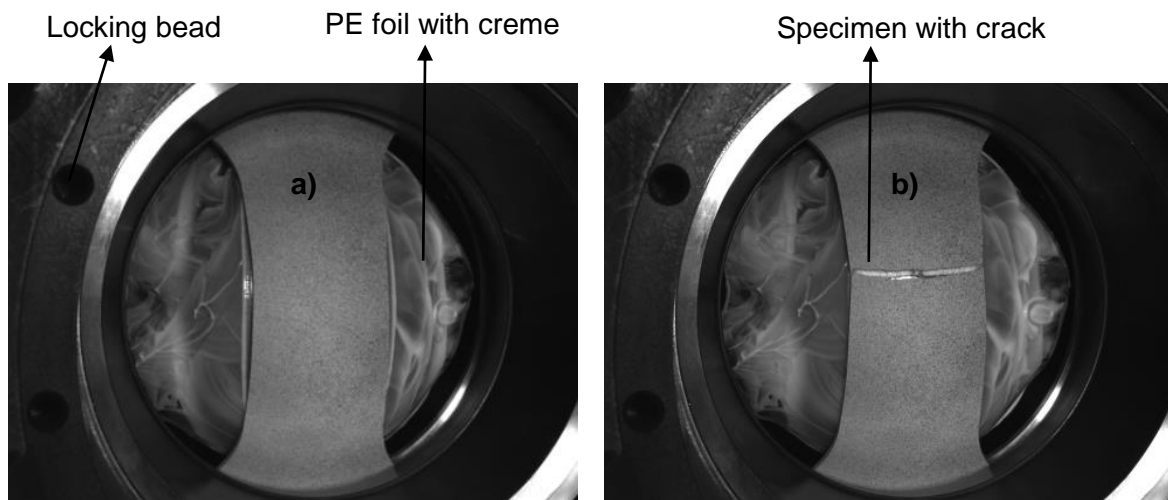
Photos of specimen which is attached to the BUP1000 machine: a) before the fracture b) after the fracture
